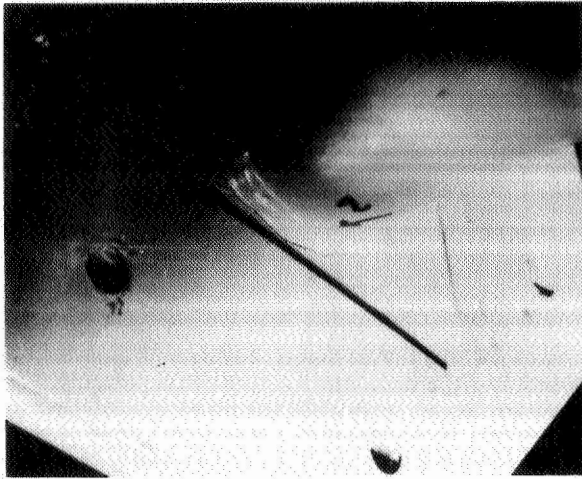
Overall view of one of the cracks in a plate on the rotor shaft.
